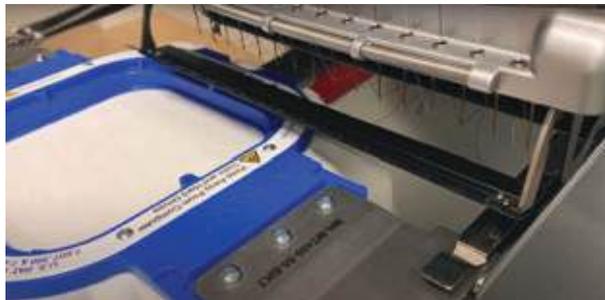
Loading hooped fabric into the embroidery machine arm
